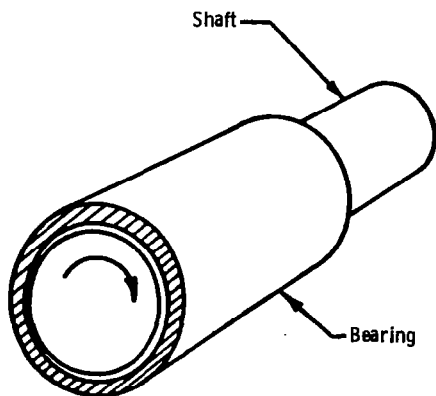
Conformal surfaces as shown in sliding surface bearing.
